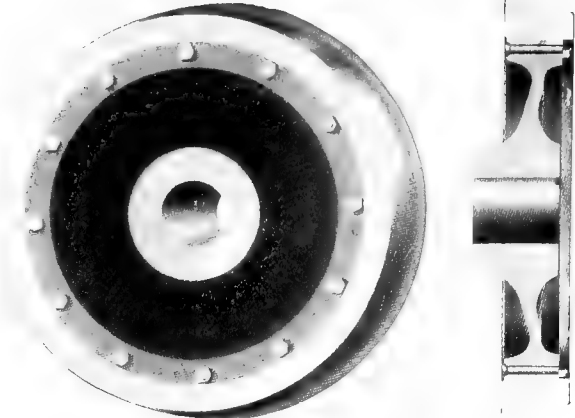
Cast Steel Plate Center with Tire Held by Shrinkage and Bolts.
